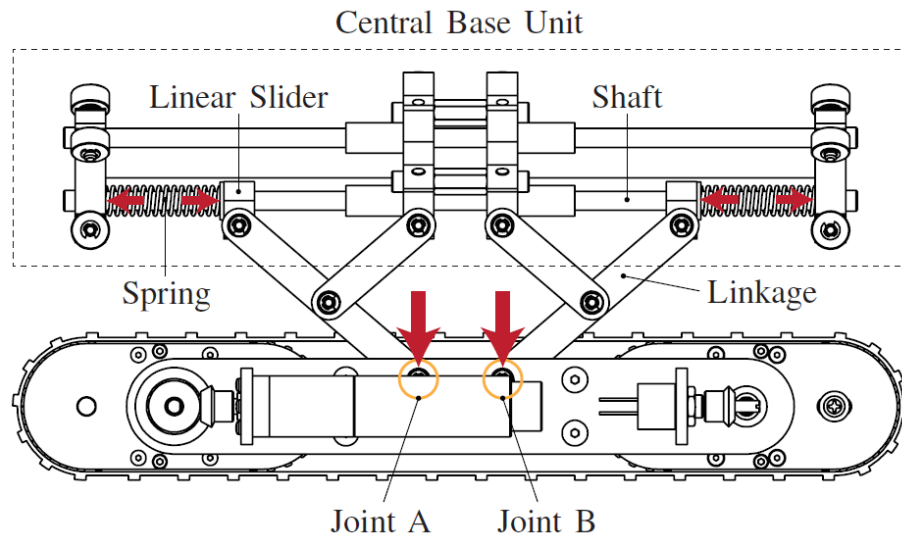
A Pantograph Mechanism Used to Change the Diameter of the Robot [23]
